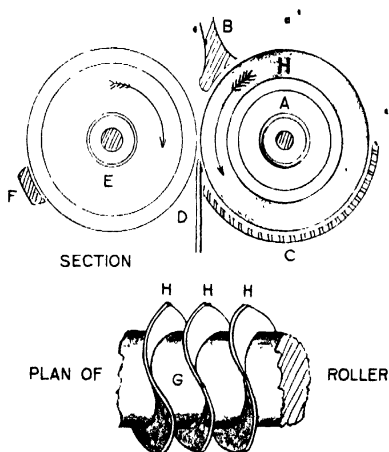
Section of Working Parts of the Knife-Roller Gin.
